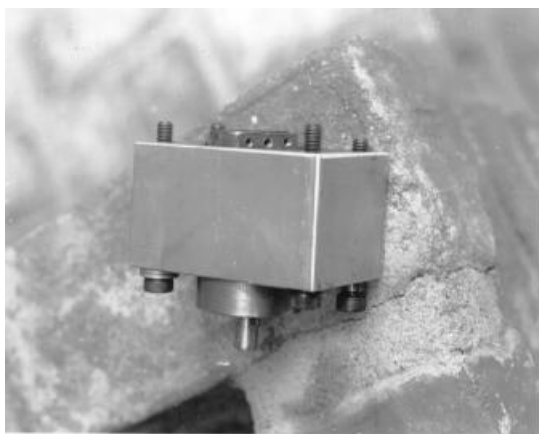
This fixture attaches to the downlock plate pin guide holes with 4 bolts. The cutter reams the downlock pin hole in the rib to the correct size and angle.
